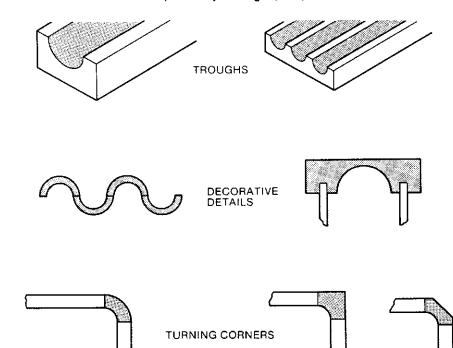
Some of the applications for workpieces that were formed by cove cutting.
